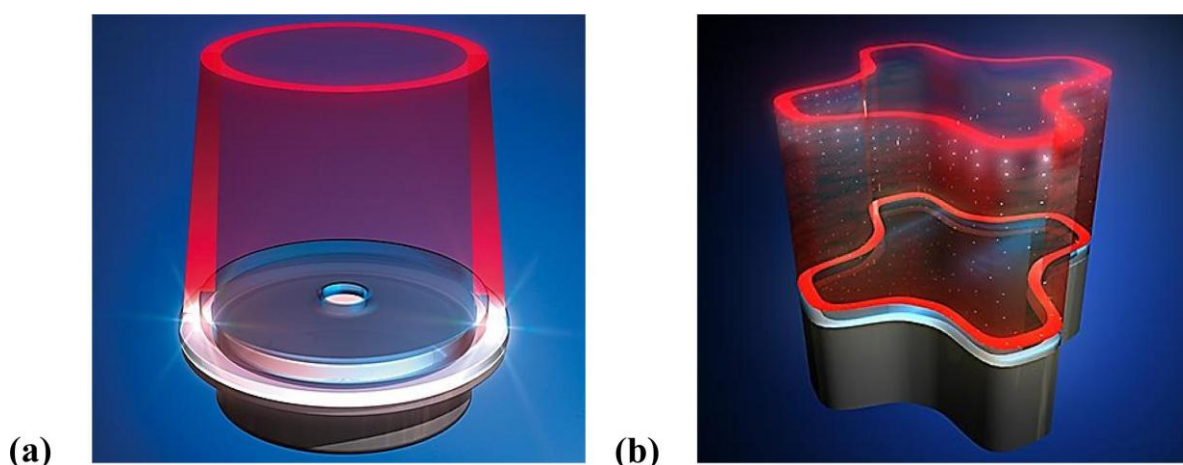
Working principle of (a) simultaneous welding, and (b) simultaneous welding with DOE [47]
